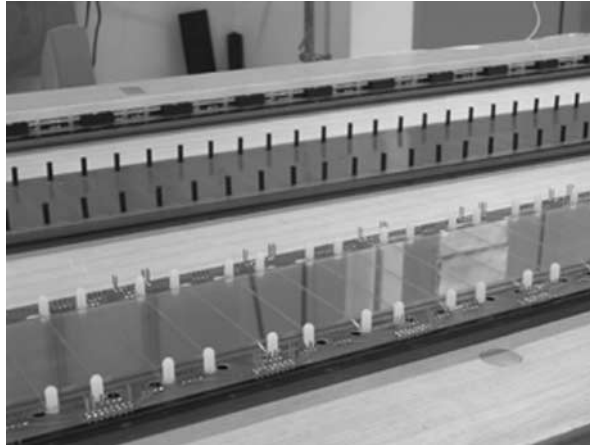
Picture of MRPC strips during different assembly steps: a PCB after having been glued on a honeycomb panel (middle), a PCB with glasses during the stretch of the fishing-line (bottom), and a finished MRPC strip (top).
